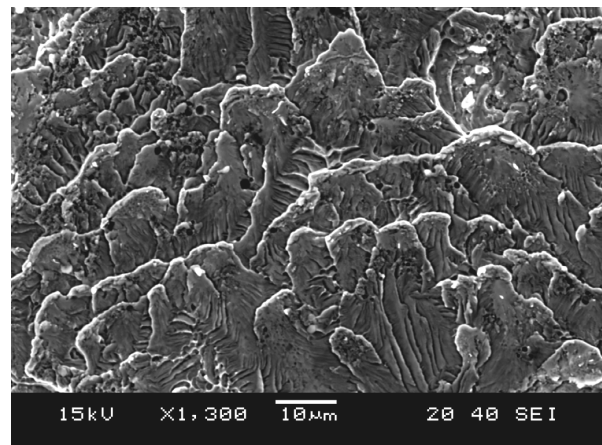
SEM of fracture surface for sample irradiated on SS suggesting quasi-cleavage fracture.
